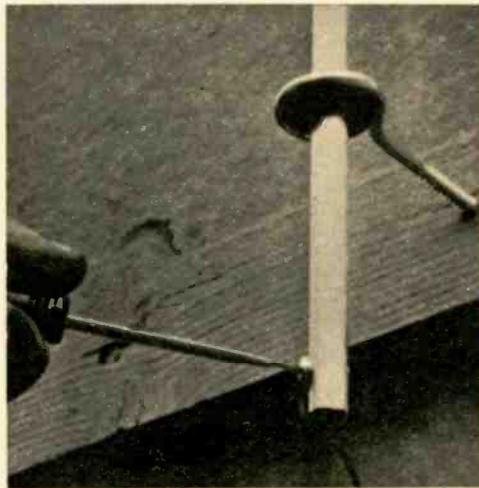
Fasten lead-in wire to bottom of vertical element with nut and bolt or sheet-metal screw. TV standoff loop should be squeezed to hold rod.
